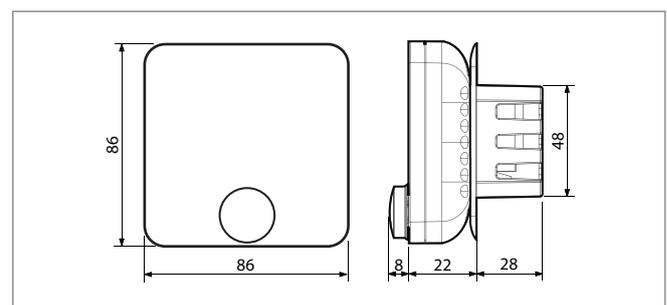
Dimensional drawing for the zone operator terminal for in-wall mounting (dimensions in mm)
